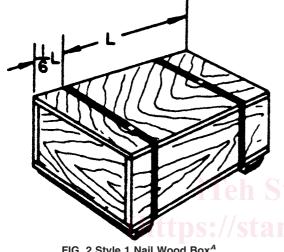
Style 1 Nail Wood Box<sup>A</sup>
